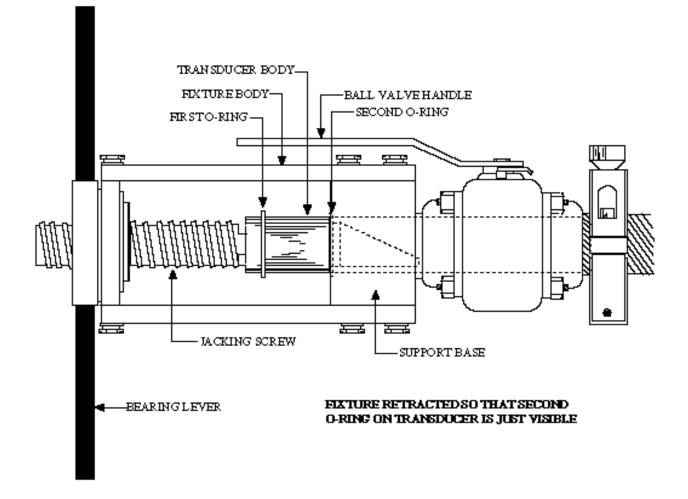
Extracting 7601 Transducer using Withdrawal Tool
